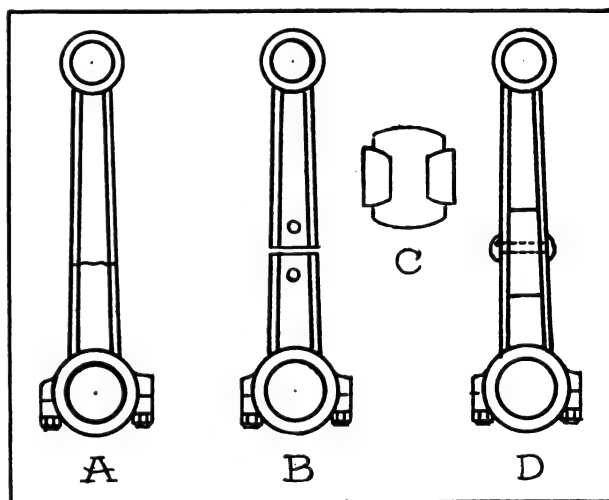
A, Broken Connecting Rod; B, Pieces of Rod Filed True, Drilled and Separated; C, Cross Section of Rod with Reinforcing Plates Fitted; D, Rod Wedged and Riveted to Prevent Movement.
